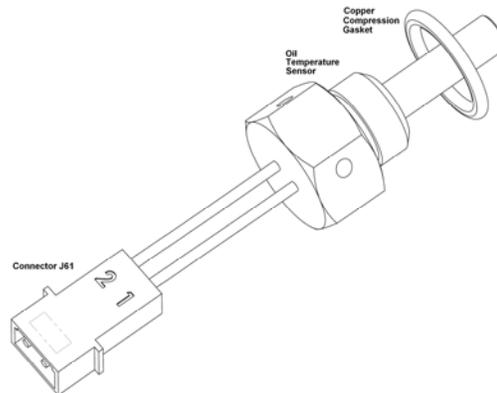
Oil Temperature Sensor Showing the Copper Compression Gasket
